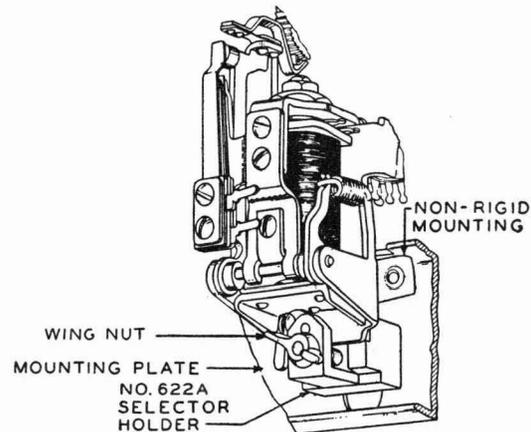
No. 622A Selector Holder in Place on Nonrigidly Mounted Selector on Channel-type Mounting Plate
